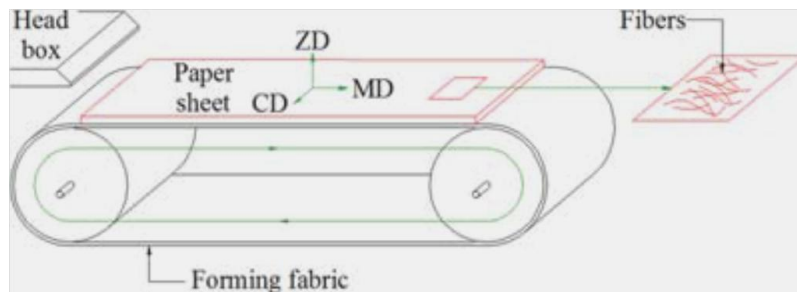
Schematic of the forming sections showing the axes used to describe a paper sample [41]
